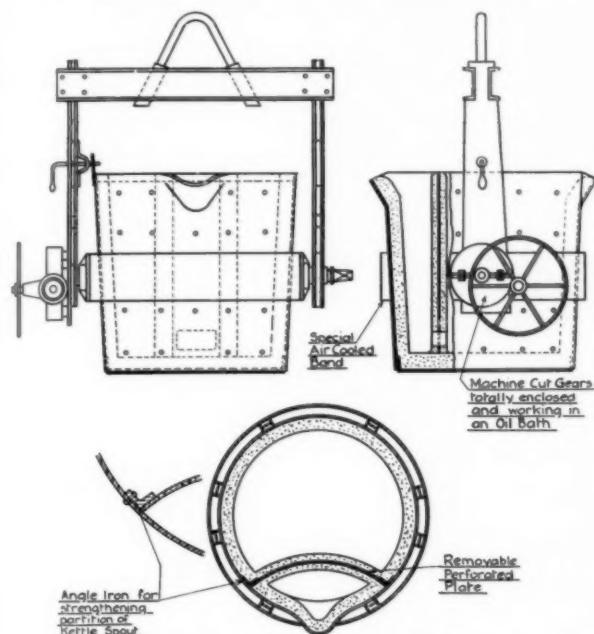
Sections and elevation giving details of the kettle-spout ladle.
